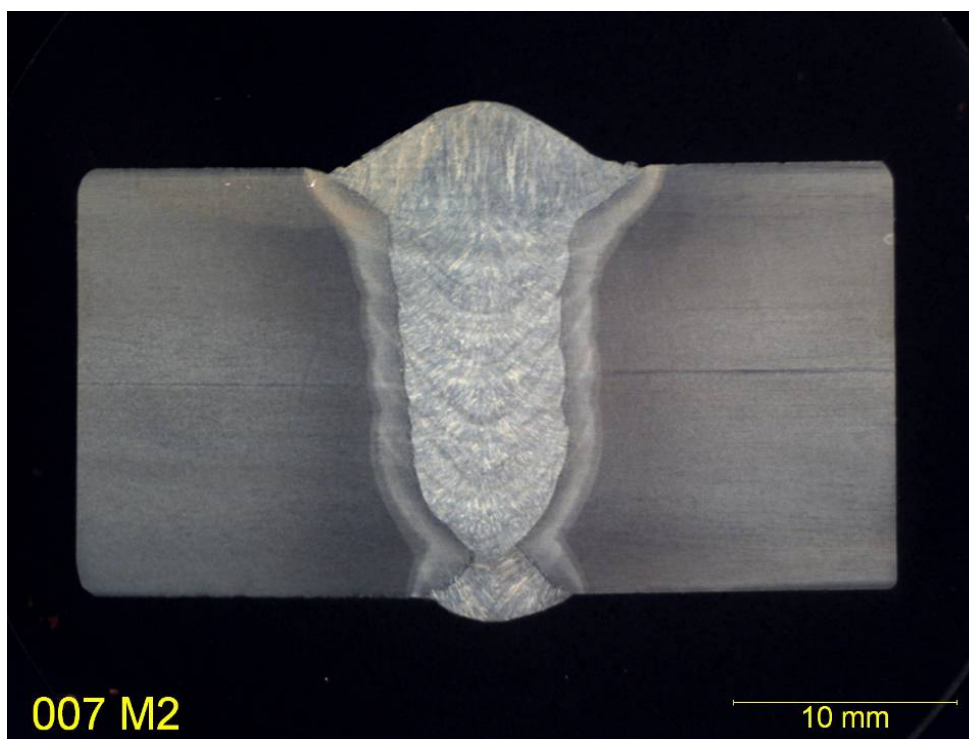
Photo-macrograph Showing Cross-section of Weld B7
